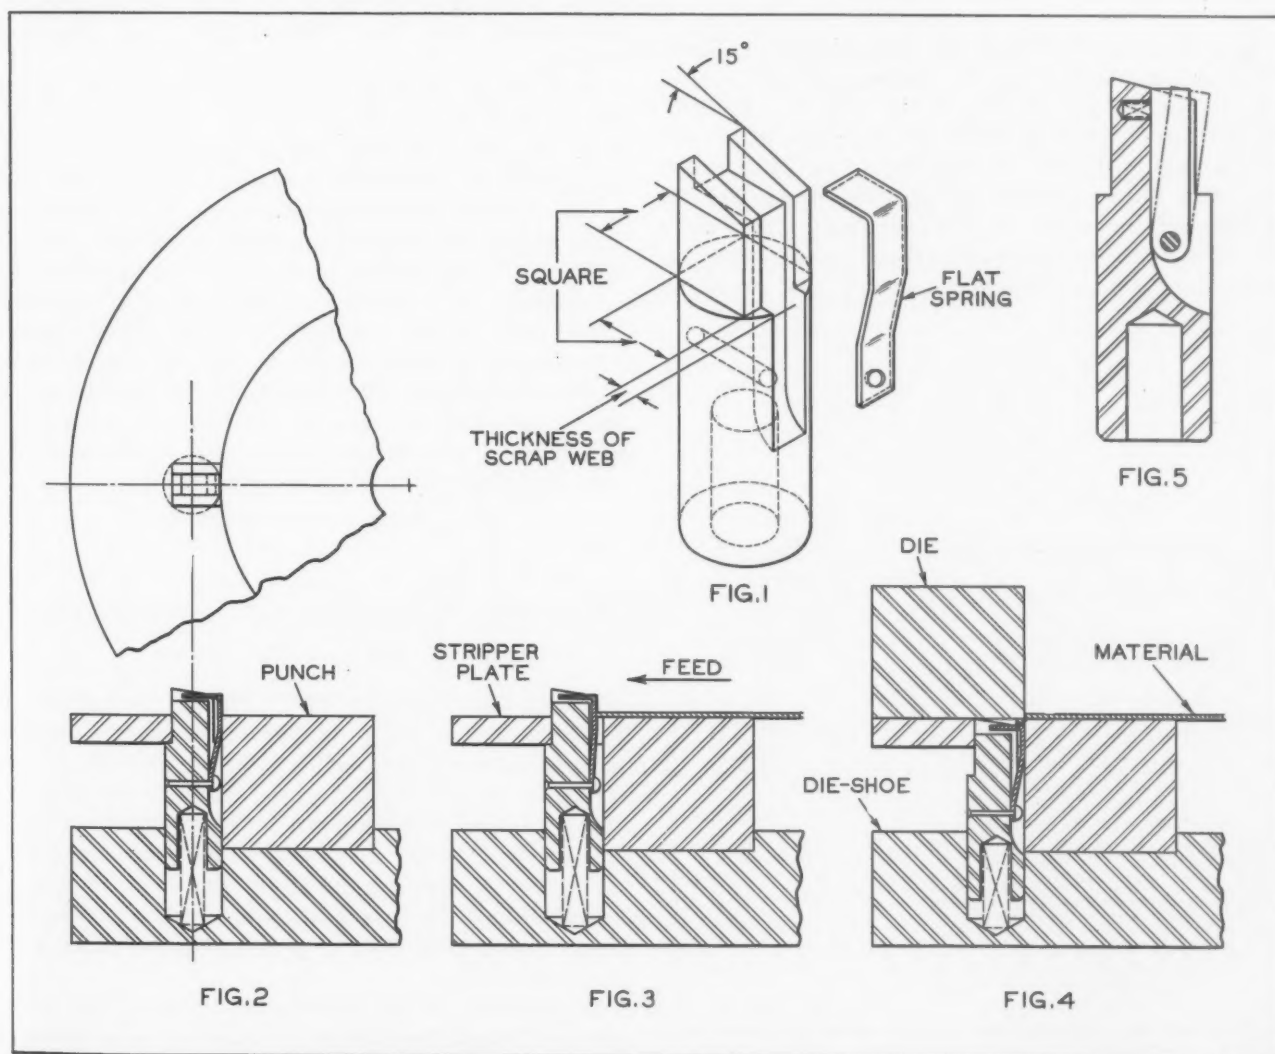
is an isometric view of the main parts of the automatic stock stop, which consists of the stop-pin and a formed flat spring. The stop-pin is made of 3/4-inch diameter drill rod. A square section is first milled on the end of the pin. The difference in size between the square section and the diameter of the pin determines the size of the scrap web in the material being punched. A 15-degree angle is then cut on the top of the pin, as shown. A slot is next cut across the top and down the side to accommodate the formed flat
